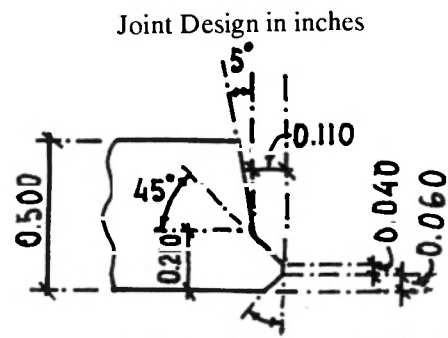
(a) Joint design for CRC Automatic Welding System
